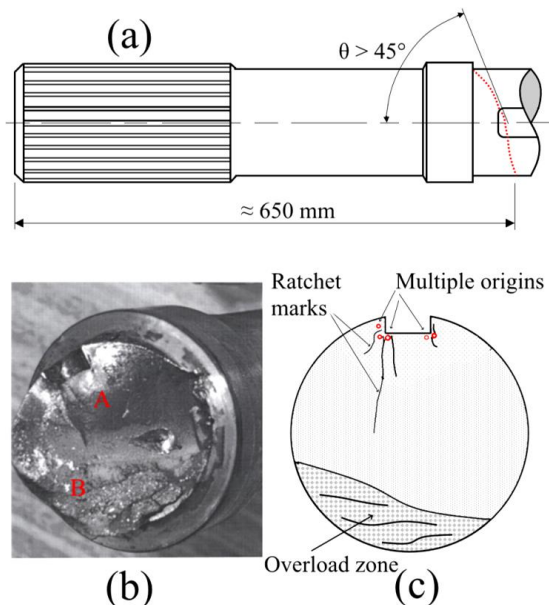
(a) The approximate location of the fracture, (b) overview of the fracture surface, and (c) a schematic illustration of the fracture surface
